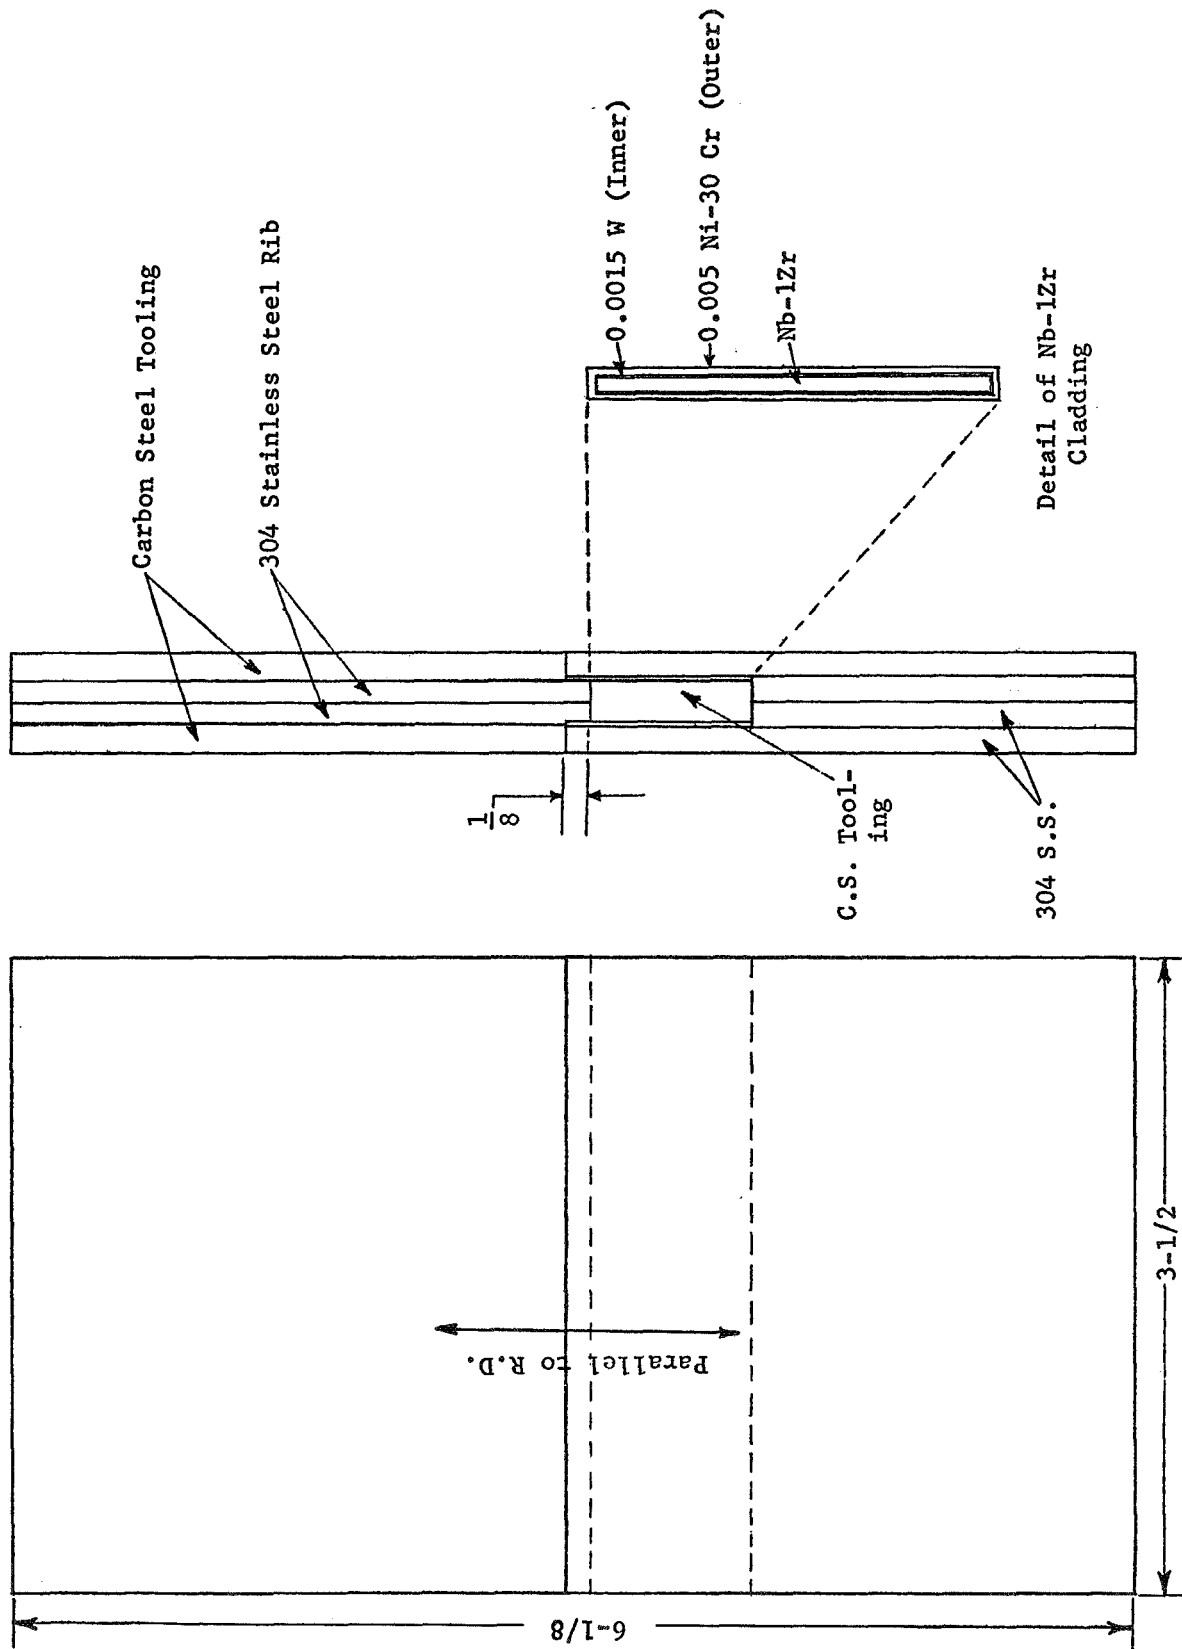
SHEAR-SPECIMEN DESIGN FOR Nb-1Zr - 304 STAINLESS STEEL LINER TO RIB BOND (SPECIMEN 3)
